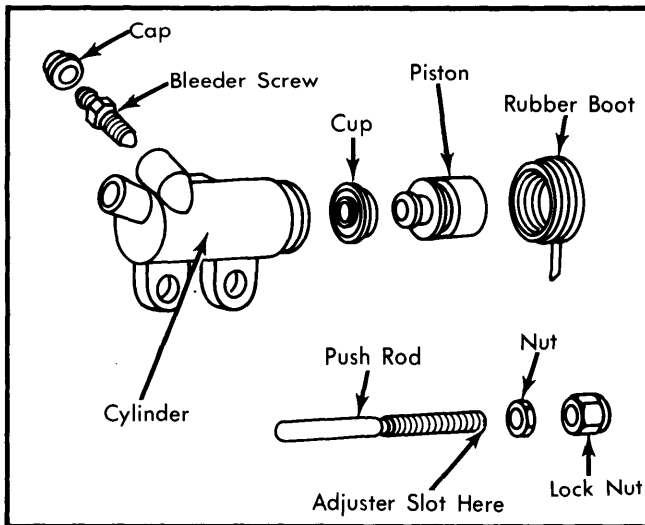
Exploded View of Slave Cylinder Pickup Models Only
